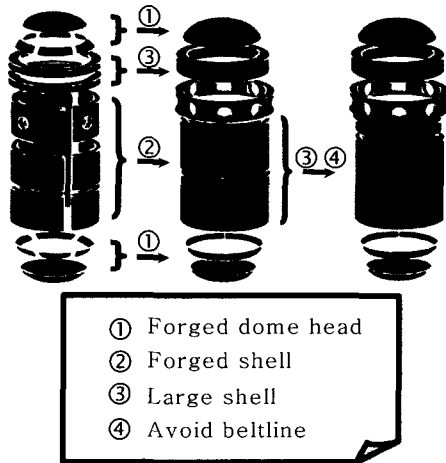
Design change of nuclear reactor vessel for reducing the welding lines and irradiation damage²⁵⁾
